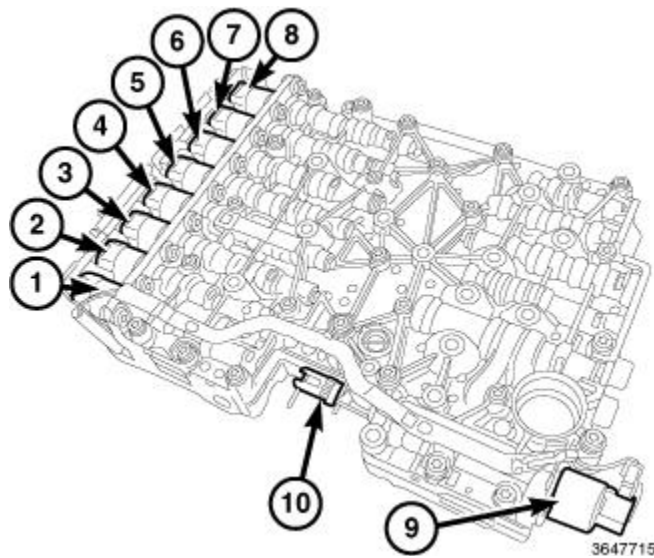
Solenoid A D E C & Park Release Mechanical Valve
